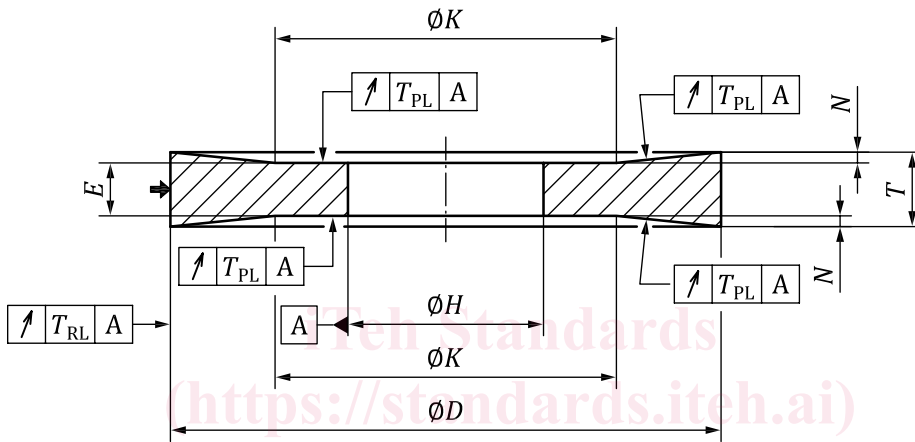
Grinding wheel, relieved on both sides (Type 21)
